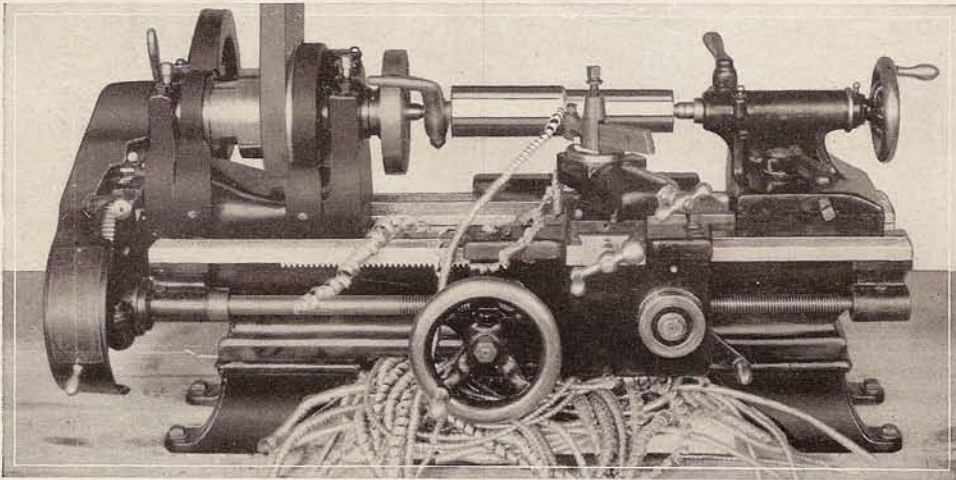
The No. 22—9-inch Junior Lathe Reducing a Steel Shaft from 2  $\frac{3}{4}$ -inch Diameter to 2-inch Diameter in One Cut
